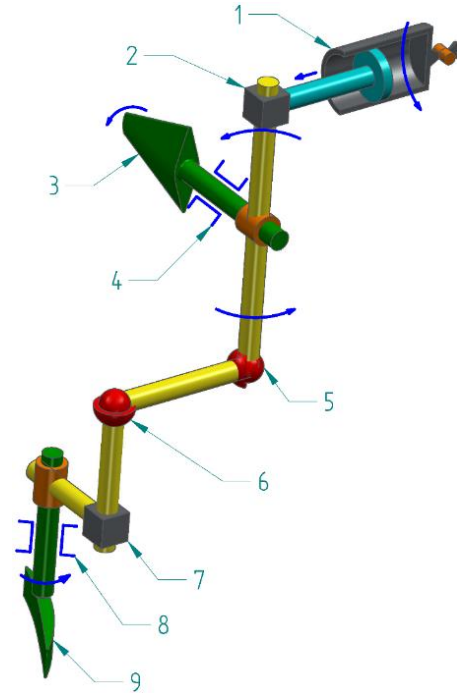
The kinematic diagram of the mechanism, where 1 – linear actuator; 2 and 7 – cylindrical joint; 3 – IGV blade; 4 – IGV bearing; 5 and 6 – spherical joint; 8 – VVD bearing; 9 – VVD blade [image generated by the author]
